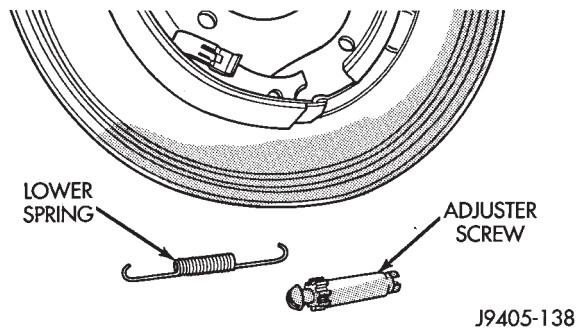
Lower Shoe Spring And Adjuster Screw Removal
